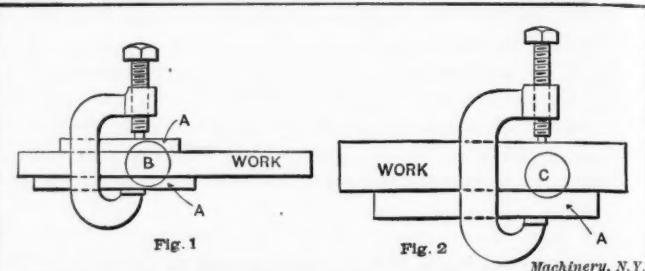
Method of Drilling a Hole which breaks through on Both Sides Fig. 2. Method of Drilling a Hole which breaks through on One Side
